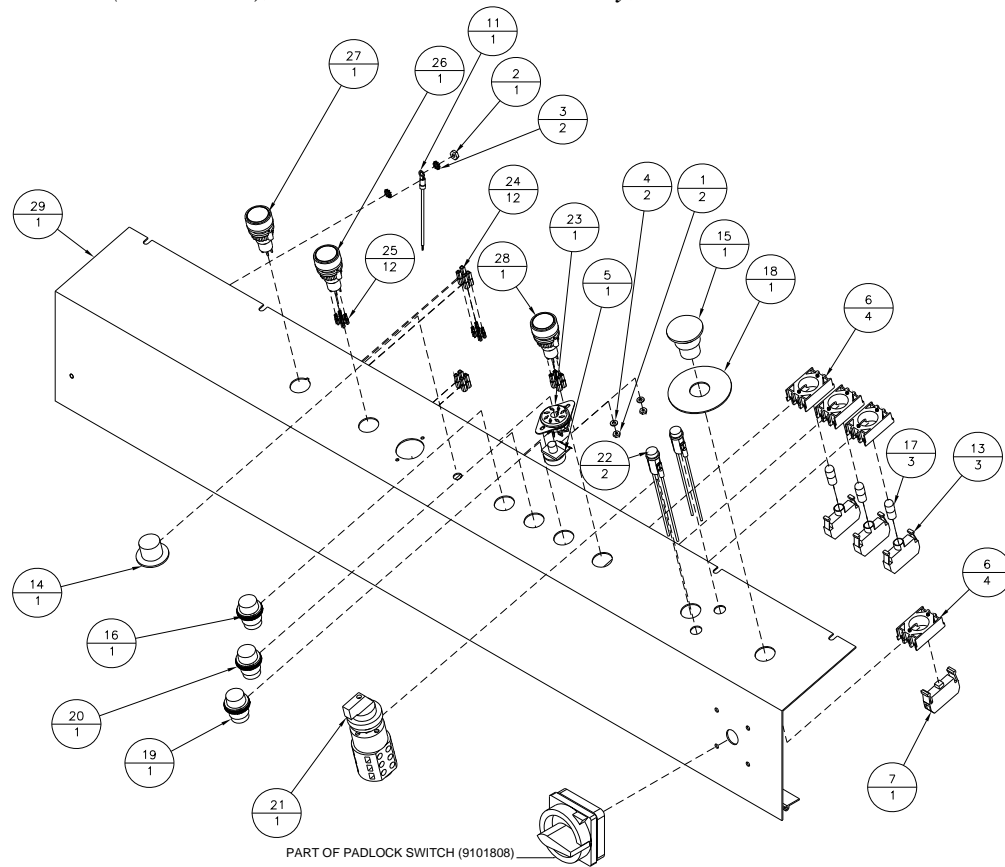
(9105606A), Instrument Panel Assembly, BK750
